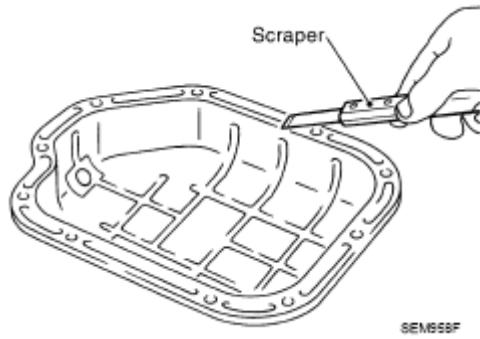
Removing Old Liquid Gasket From Mating Surfaces Of Oil Pan (Upper)
